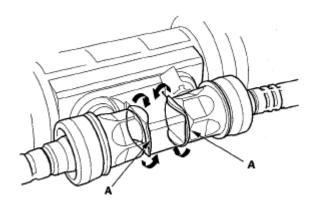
Bending Lock Washers Against Flat Spots On Bracket With Large Pair Of Pliers Courtesy of AMERICAN HONDA MOTOR CO., INC.
